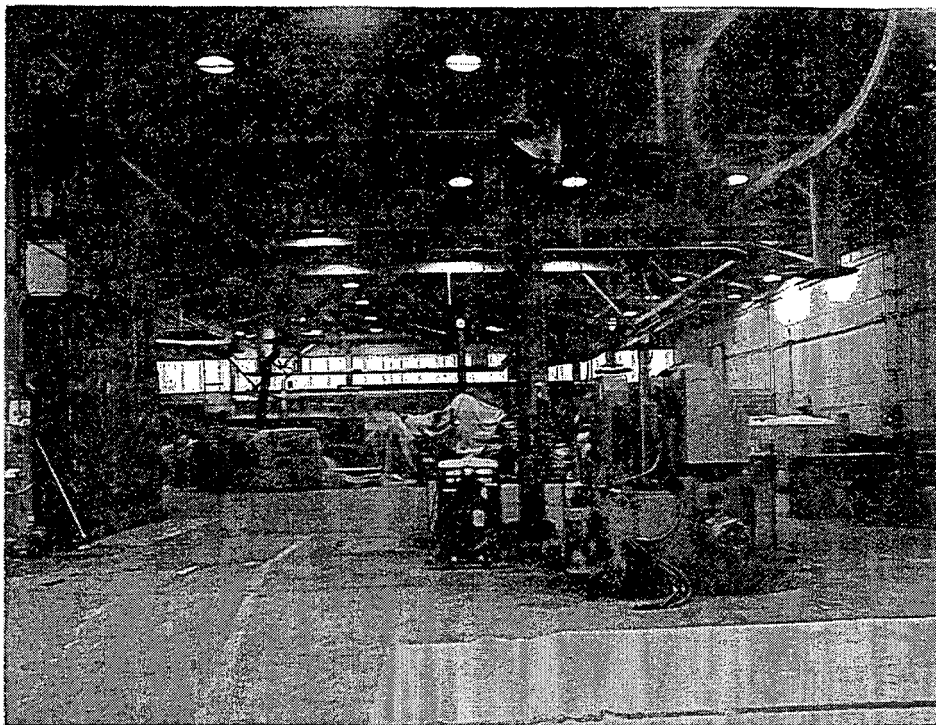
Building 9A - Casting and Machining Area, Facing East
